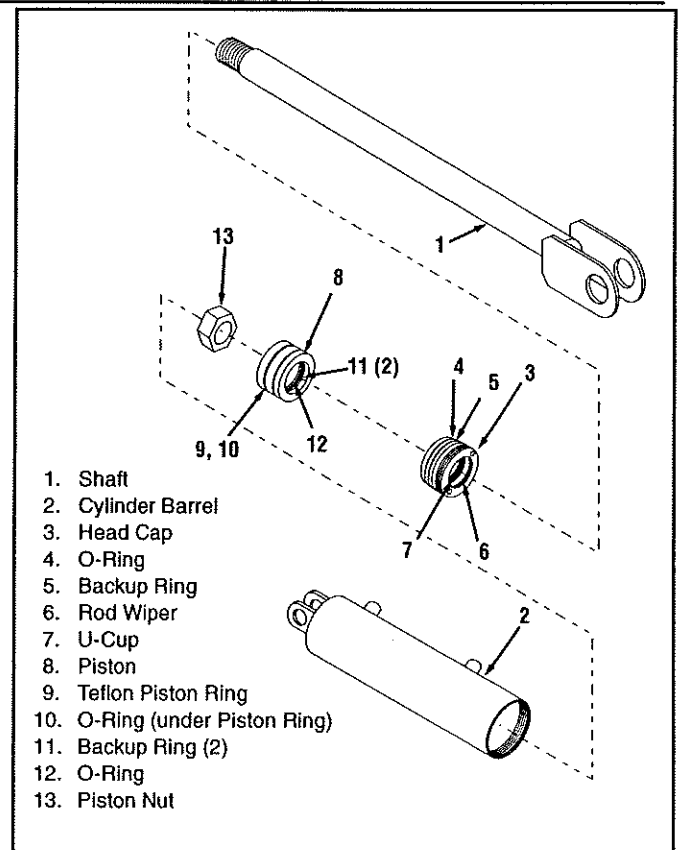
Brake and Steering Cylinder Seal Kit, Part Number: 065397-011
